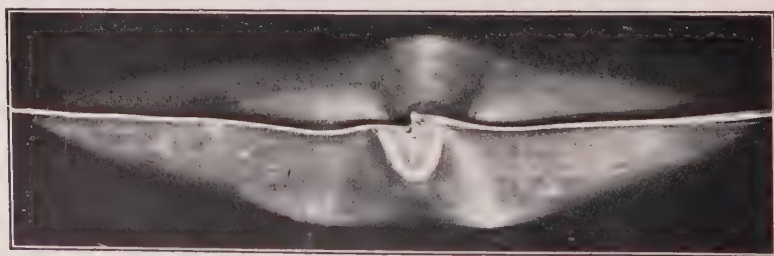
TWO PIECES OF METAL SEAM WELDED AT EDGES, WHICH HAVE BEEN SUBJECTED TO HYDROSTATIC PRESSURE.
